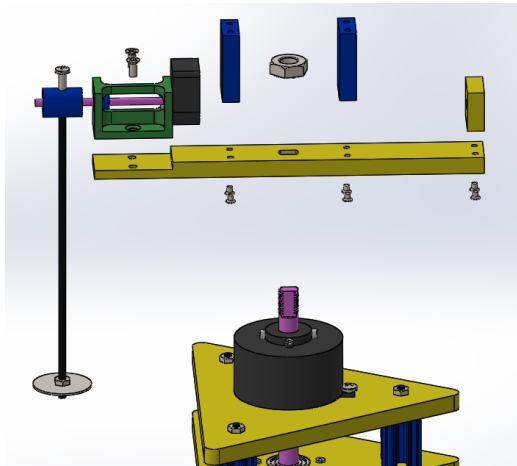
Method for Affixing Main Pendulum Boom Assembly
